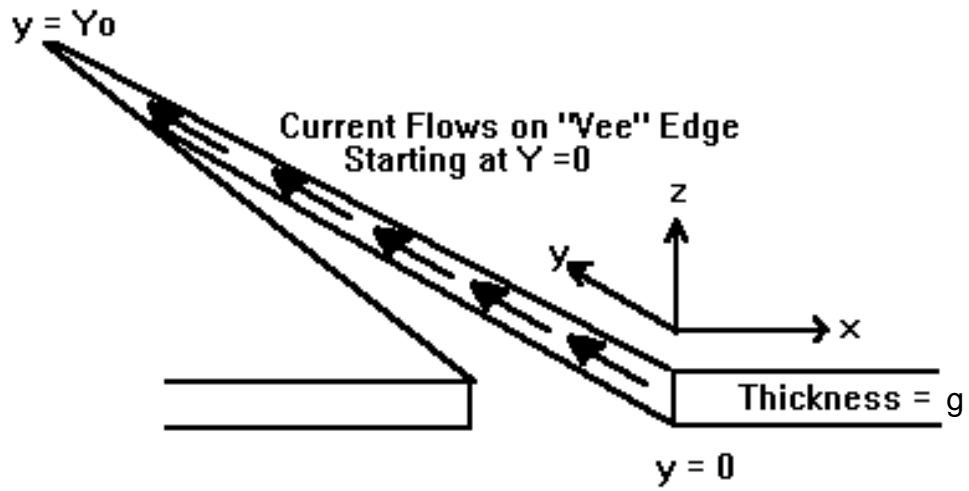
Geometry of Weld "Vee" Used in Analysis
